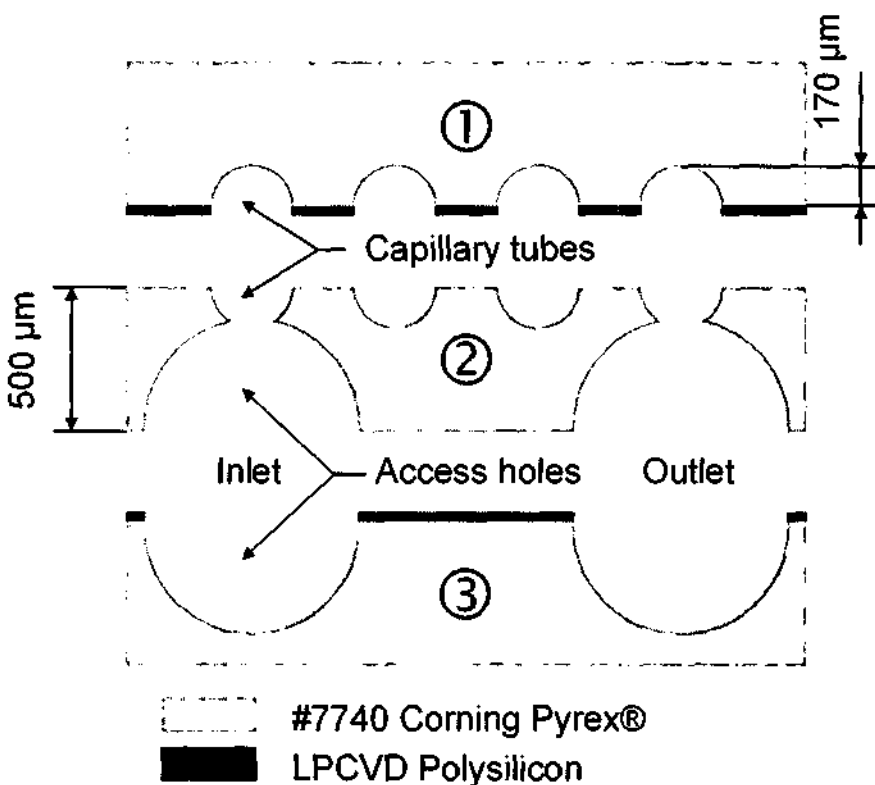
Exploded cross-section of the capillary tubes with inlet and outlet access holes just before bonding.
